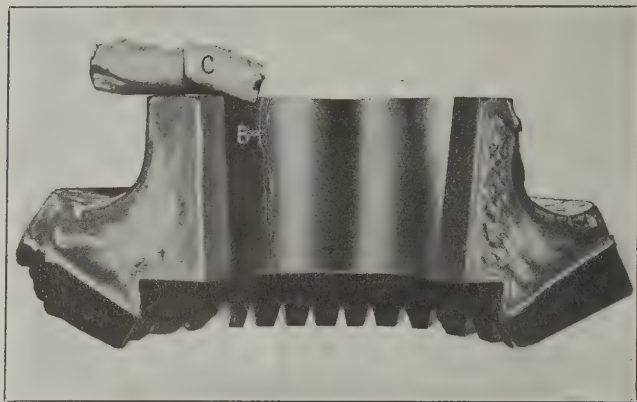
An Automobile Drive Pinion broken to show Structure of Steel after Heat-treating
